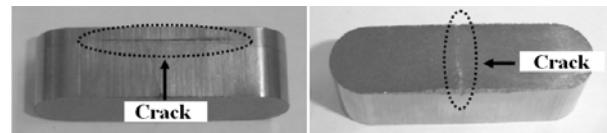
Crack defects after ejection of SMC from the 1st design mold
